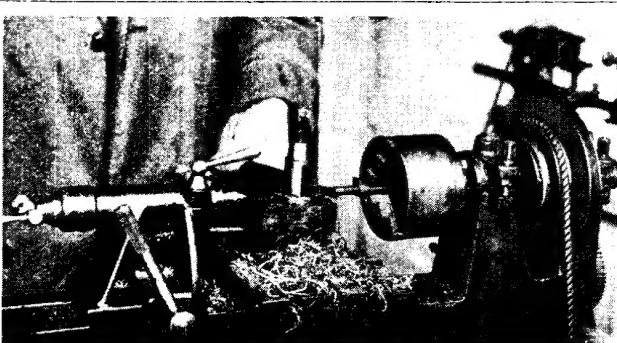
Ebonite rod of $\frac{1}{2}$ in. diameter is being shouldered down to receive the tubular contact for the plug. It should be slightly tapered to ensure firm attachment.
